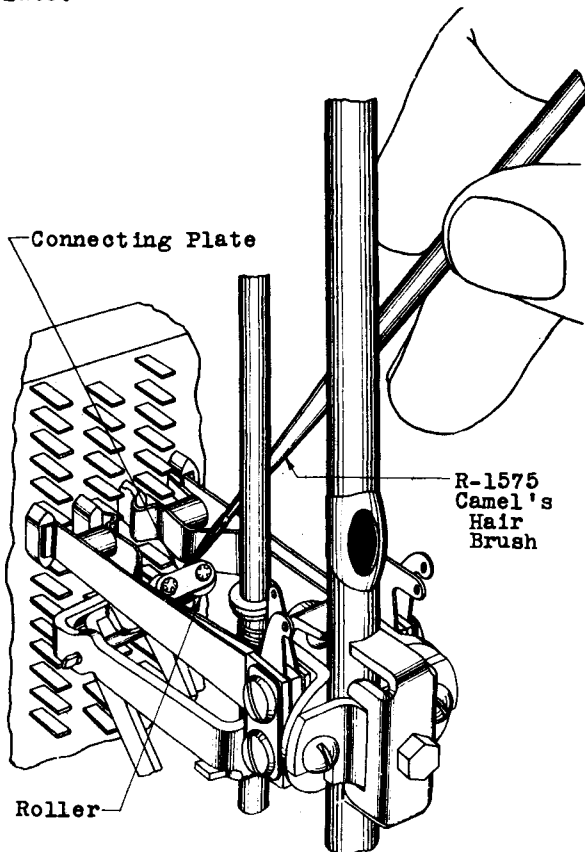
Fig. P - Method of Lubricating the Connecting Plate and Rollers on the Trip Lever Assembly
